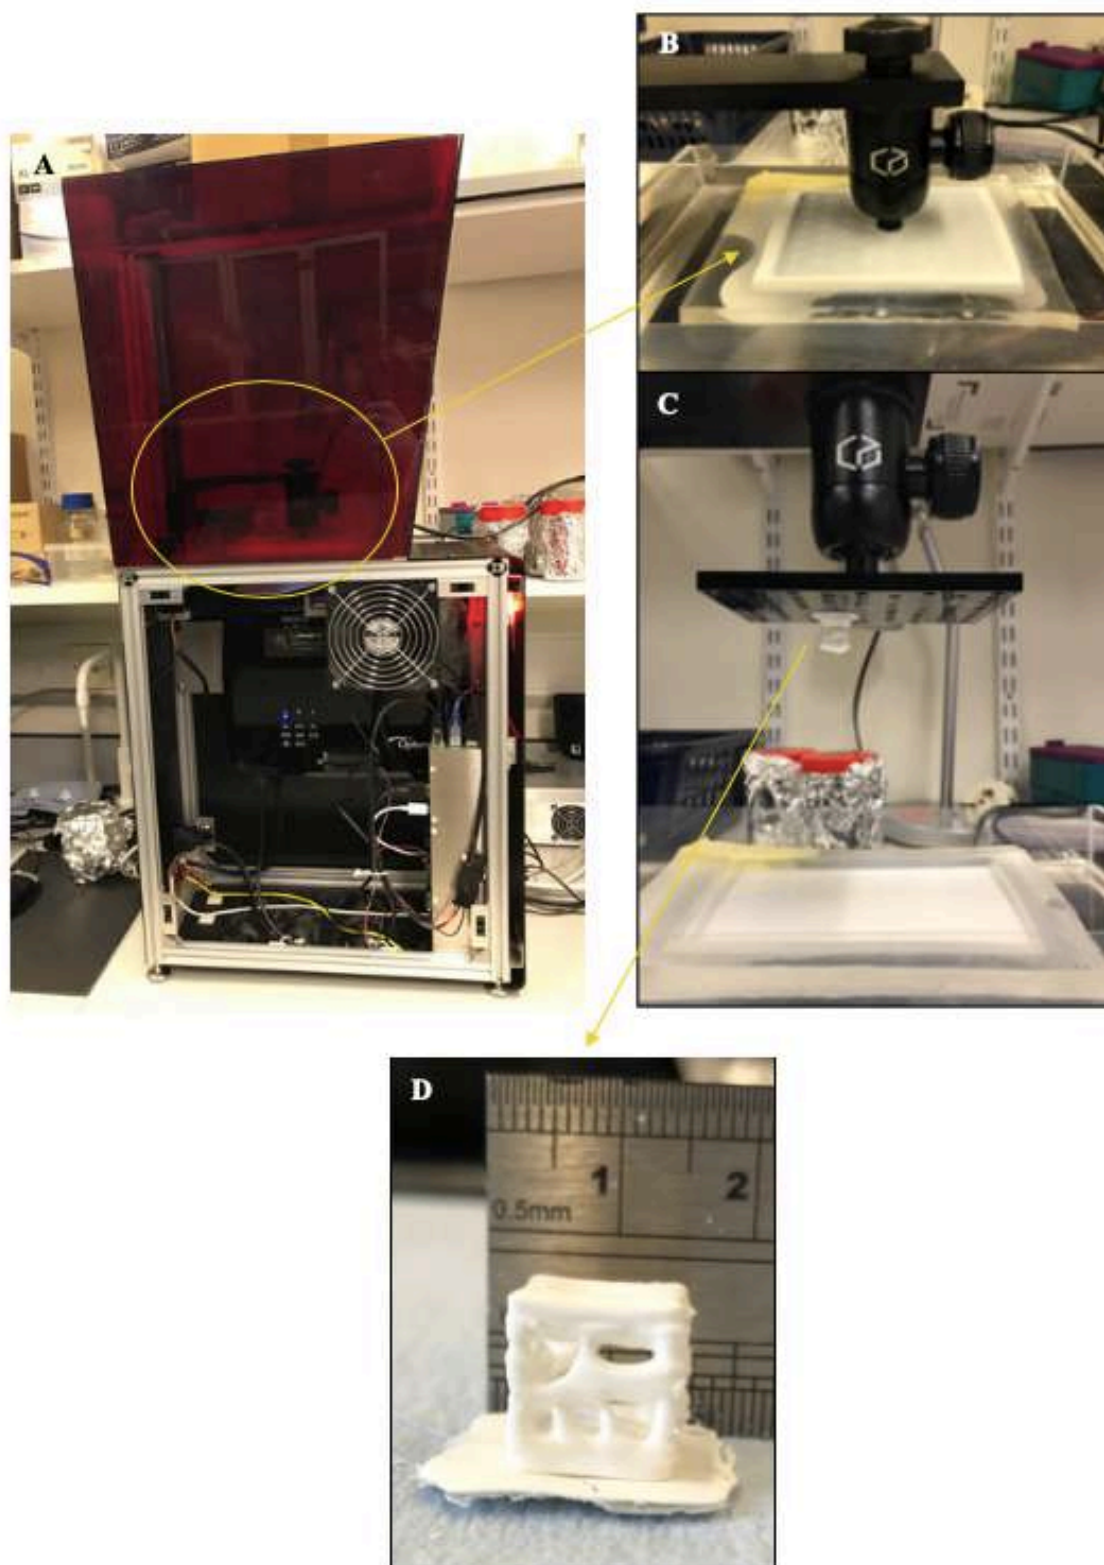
5. Kudo 3D printer (A), while printing (B), after finishing printing (C), and the polyHIPE sample formed by Kudo 3D printer (D)
